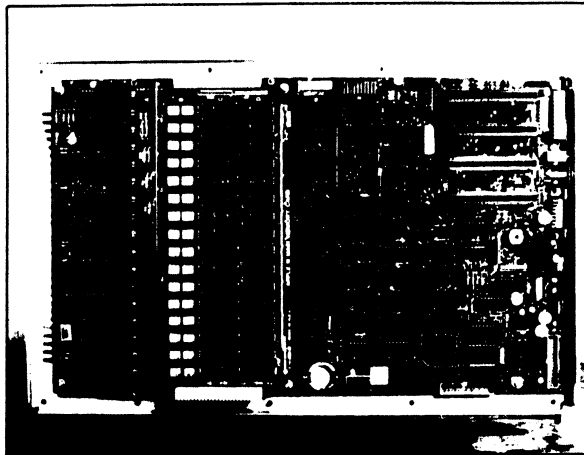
The Apple III main PC board. The piggy-back-mounted board to the left of center is the removable main memory board. Using this board, the Apple II can be expanded to its full memory capacity without using up any of its I/O expansion slots.
